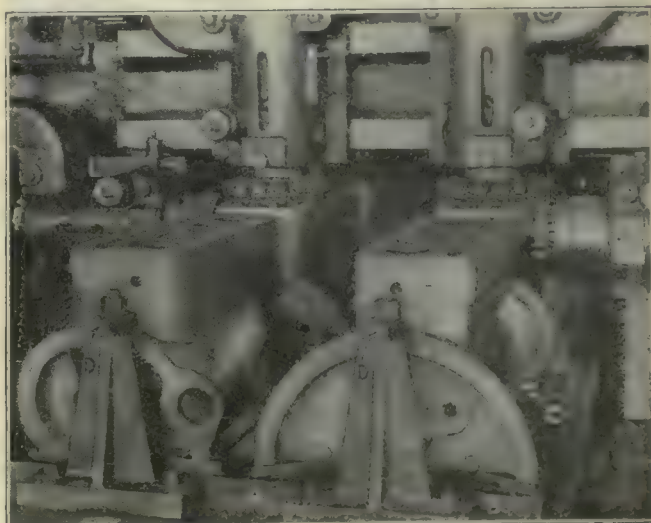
MILLING TOP AND SIDES ON A LARGE CONTINUOUS MILLING MACHINE
